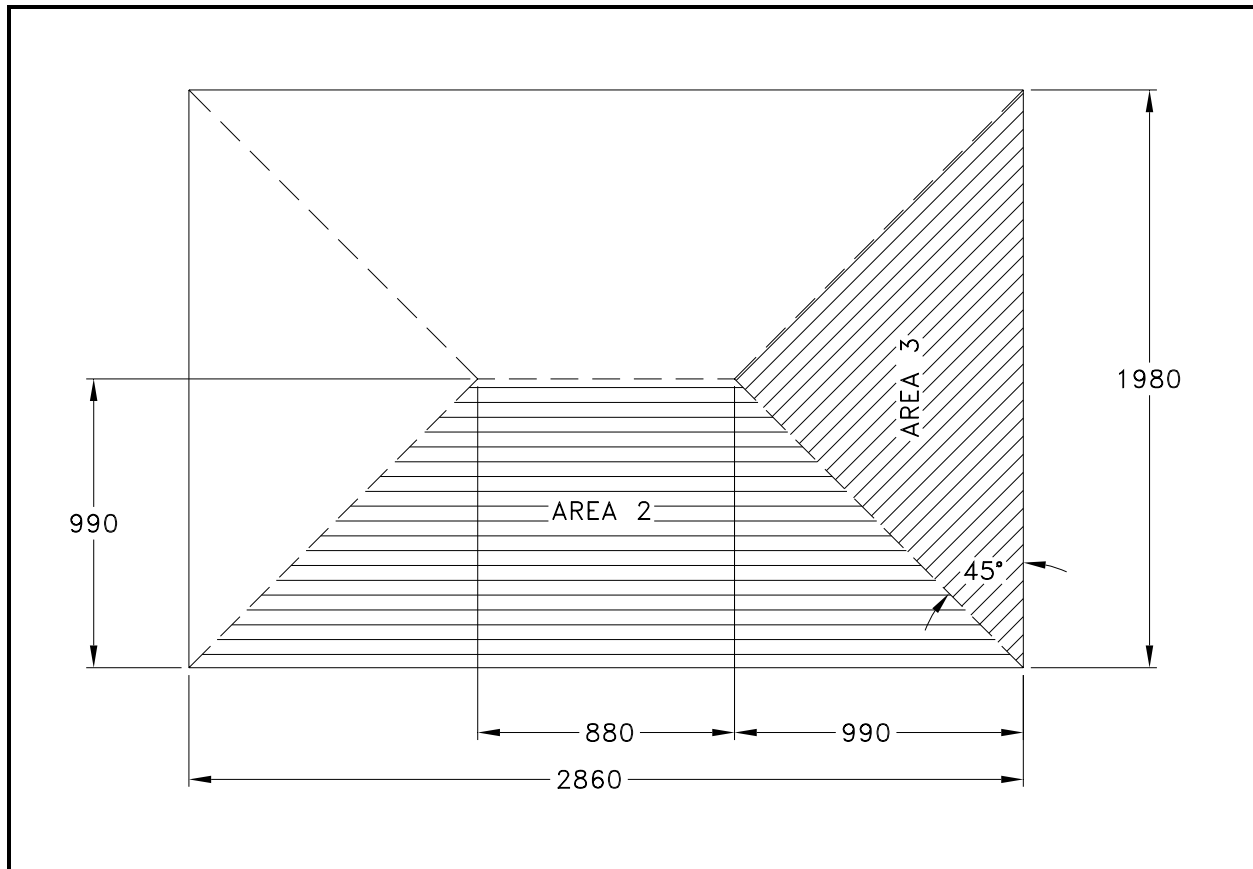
View of Area 2 on Top Sheet Used to Calculate Top/Bottom Edge Loads on Sidewall
